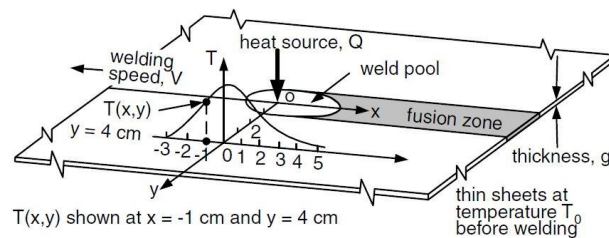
Two-dimensional heat flow during welding of thin workpiece.
